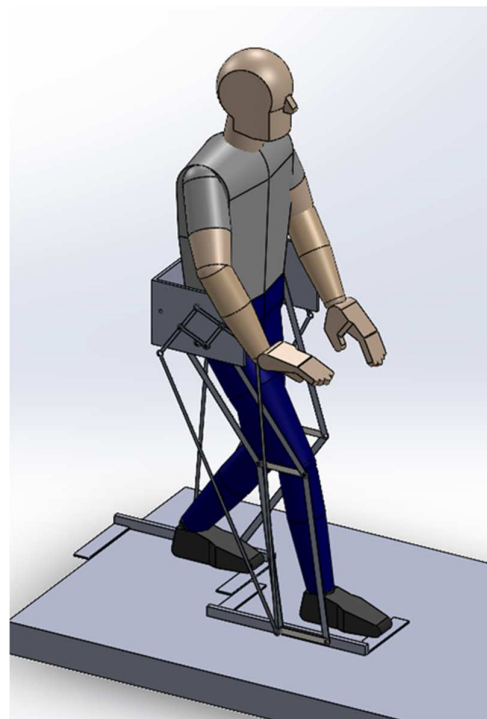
Isometric view of leg mechanism with proposed six bar mechanism
